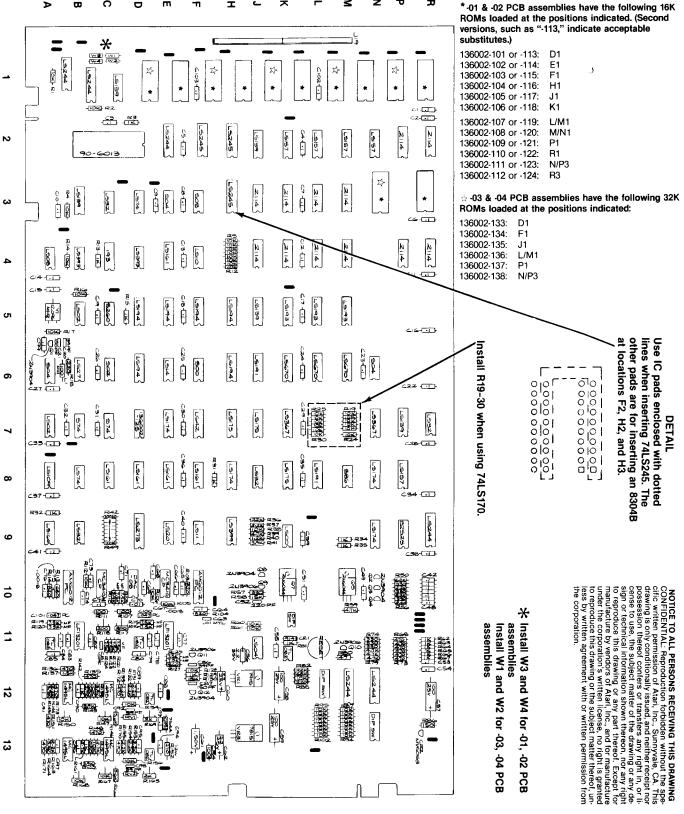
Tempest[™] Analog Vector-Generator PCB Assembly A037383-01 thru -04 C
